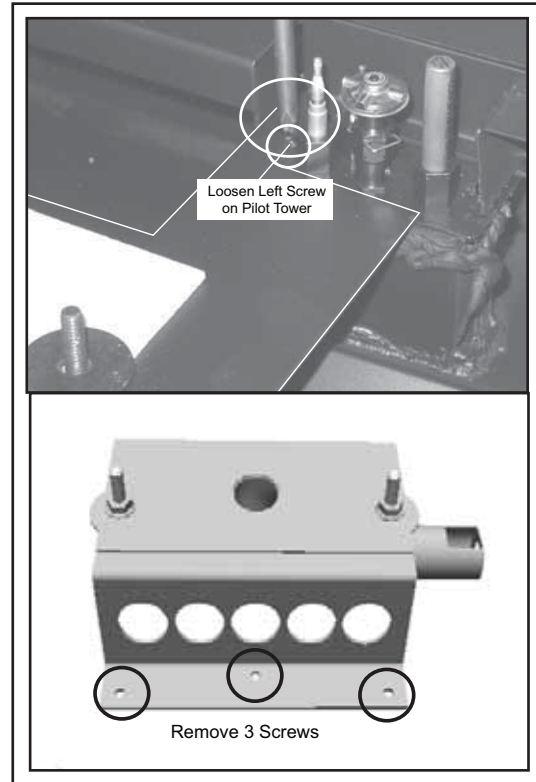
Remove the burner support by loosening the left screw on the pilot tower, and removing the three screws on the front side of the burner neck support.
